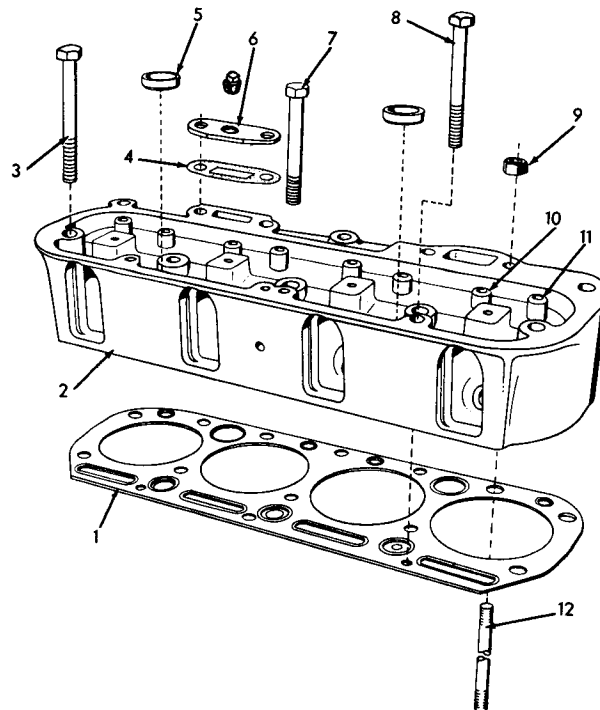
CYLINDER HEAD - USED PRIOR ENGINE #289000
